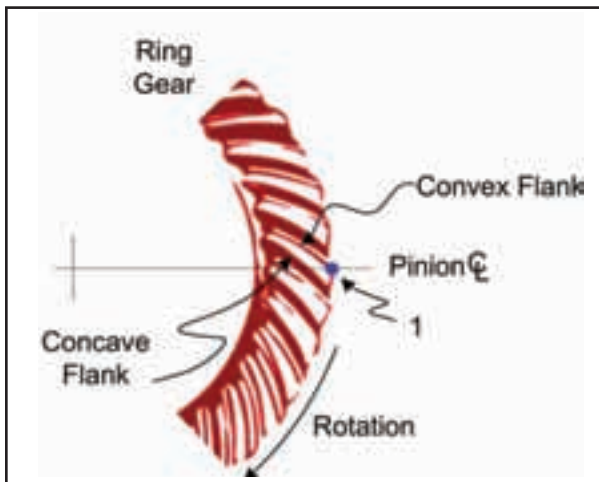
The pinion concave flank drives the ring gear convex flank, and the gear rotates in the direction shown.
